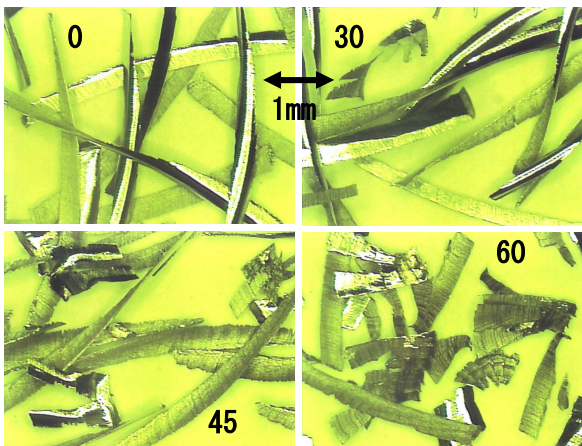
Photographs of chip (Unequal helix Angle Endmill(C) Workpiece: SUS304)
